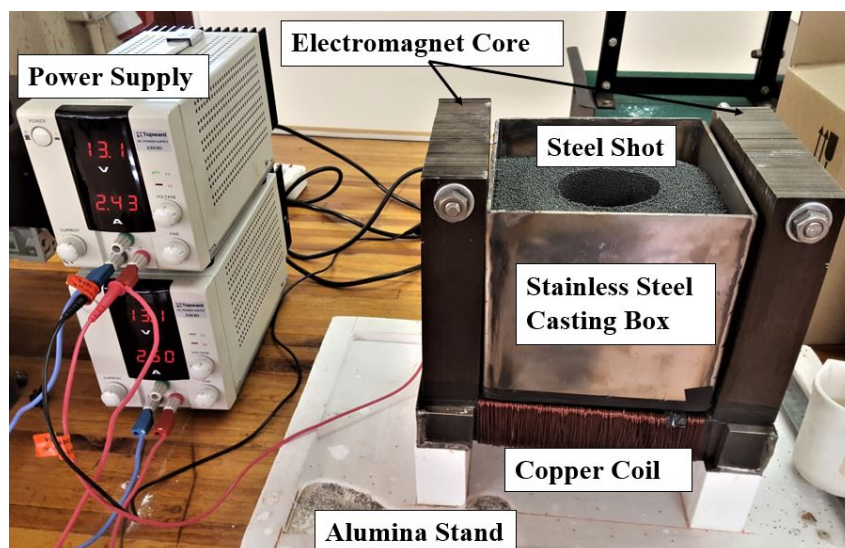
A photo of the assembly of the magnetic moulding setup
